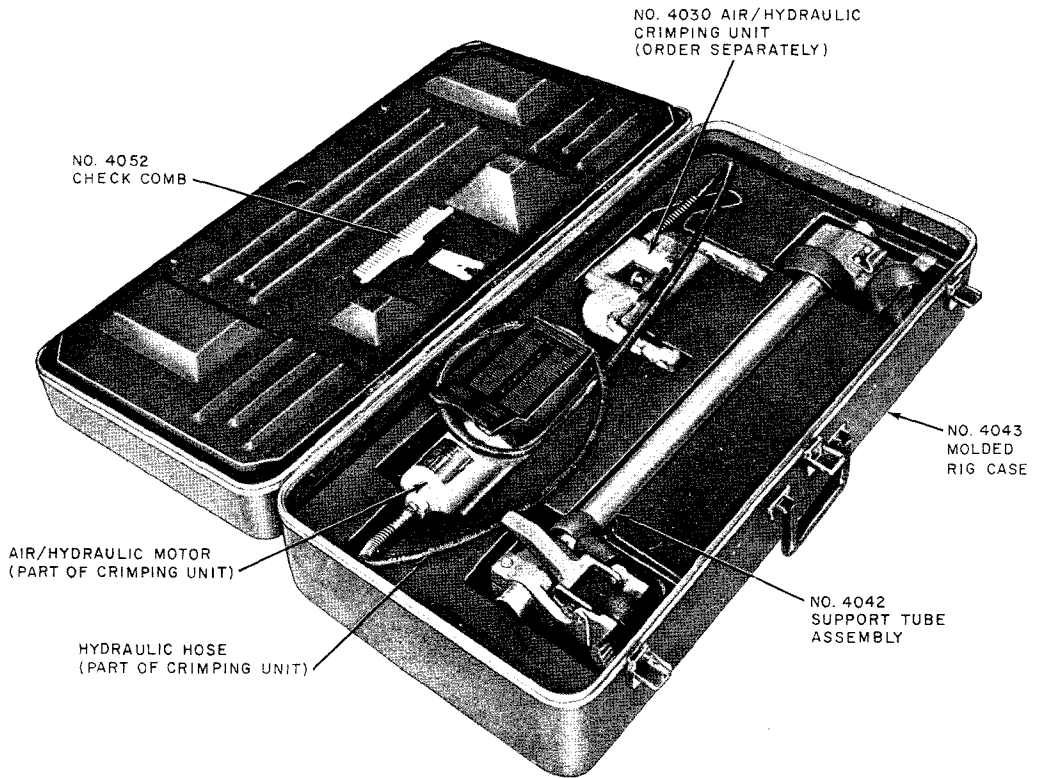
No. 4030 Molded Rig Carrying Case—Bottom Compartment
